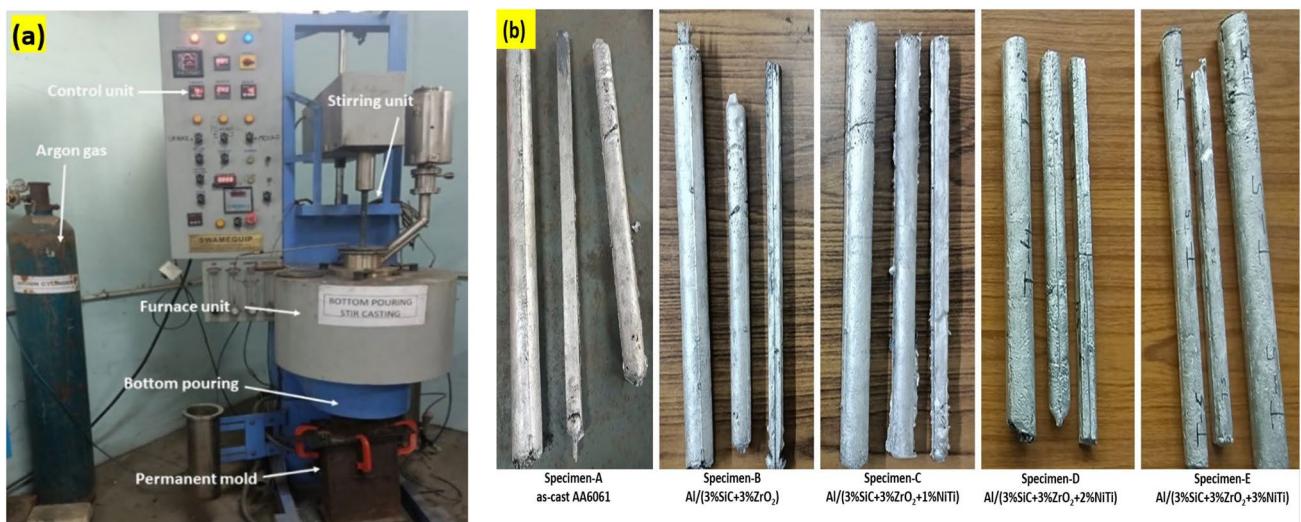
a Stir-casting set-up; b different fabricated AMMC specimens
